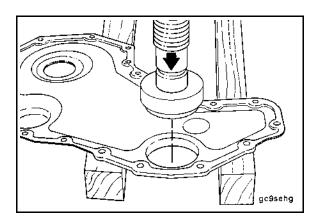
PRESS THE SEAL INTO THE FRONT COVER
